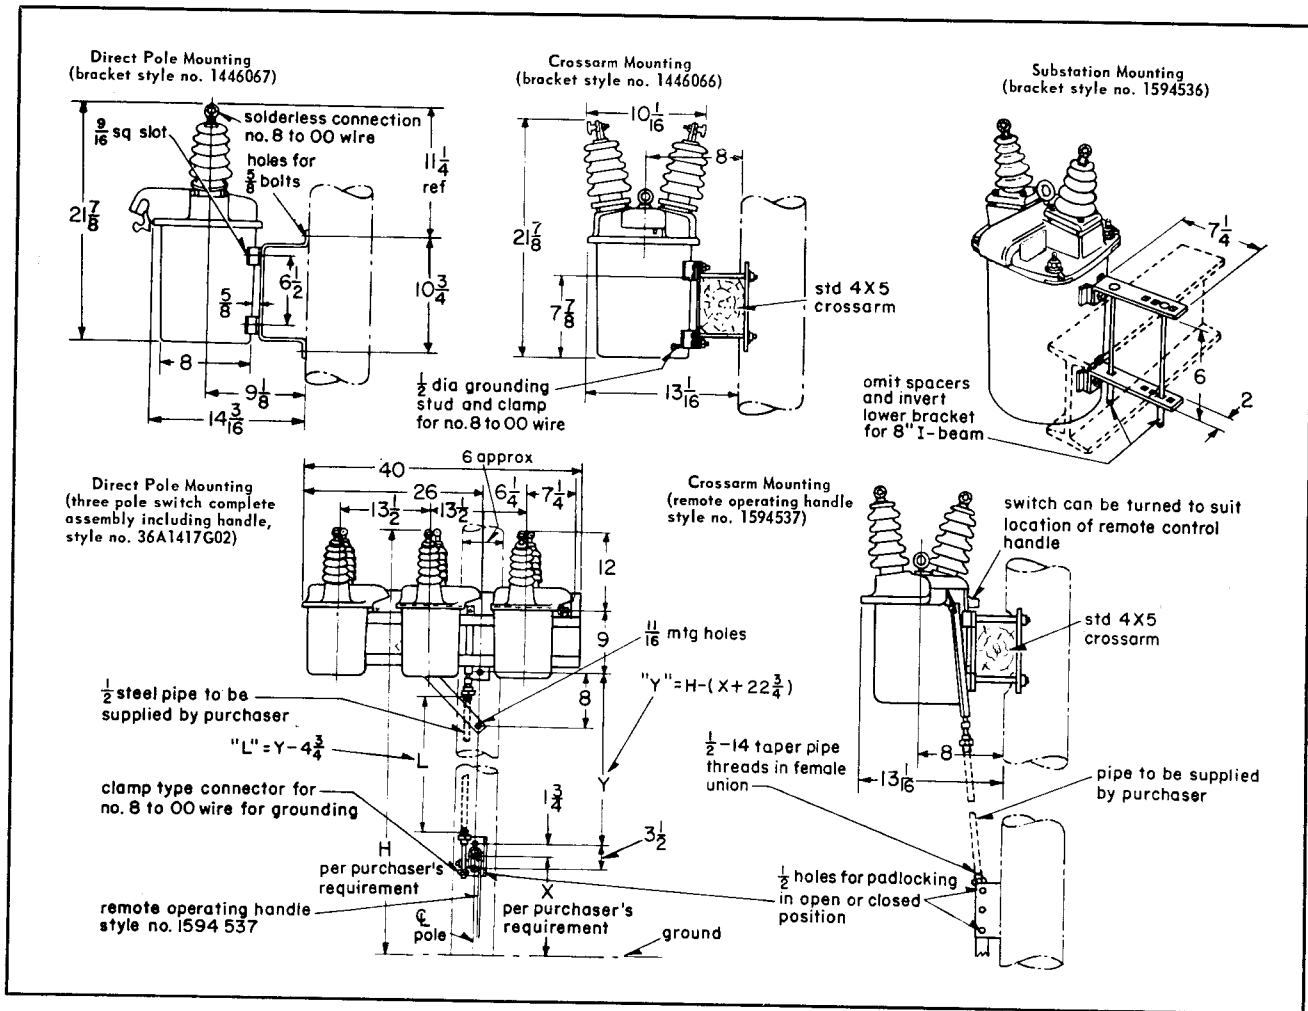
Outline Dimensions of Type CSO Oil Switch
